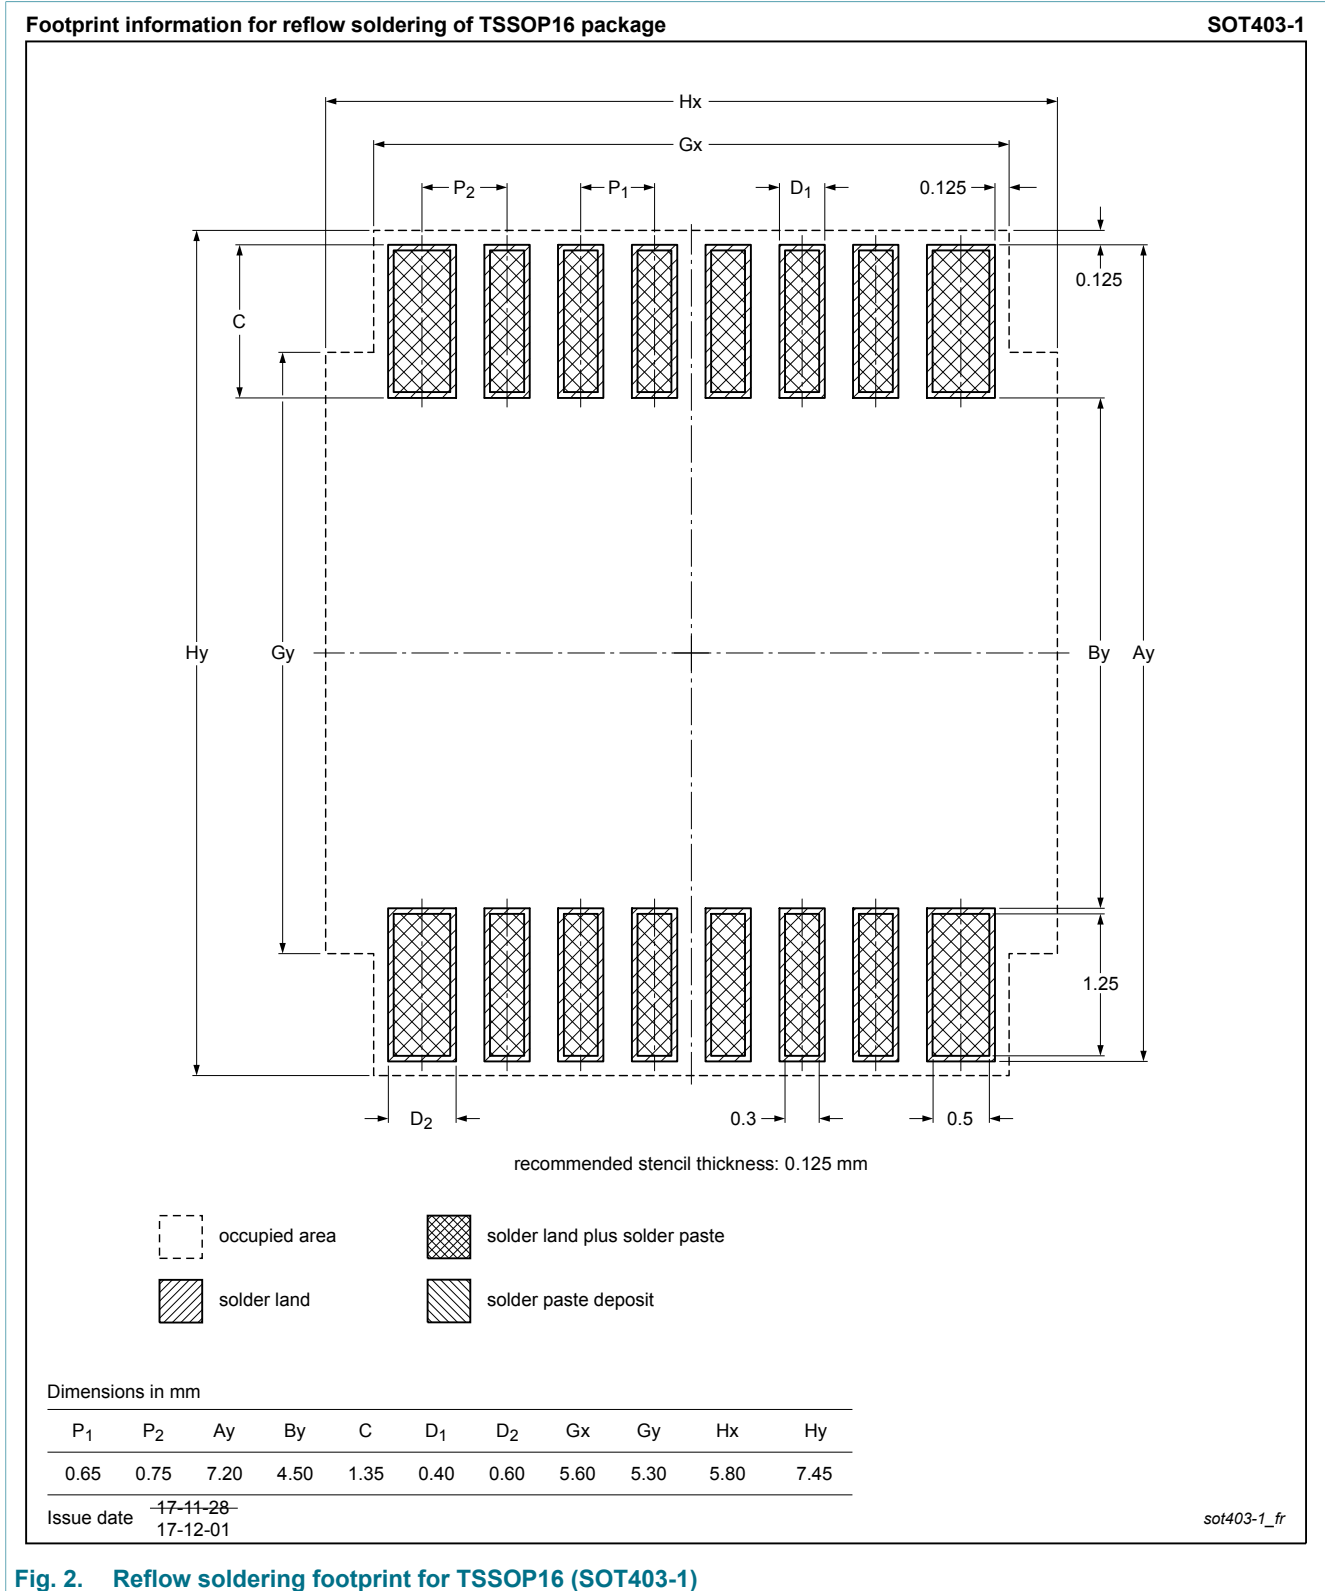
Reflow soldering footprint for TSSOP16 (SOT403-1)
